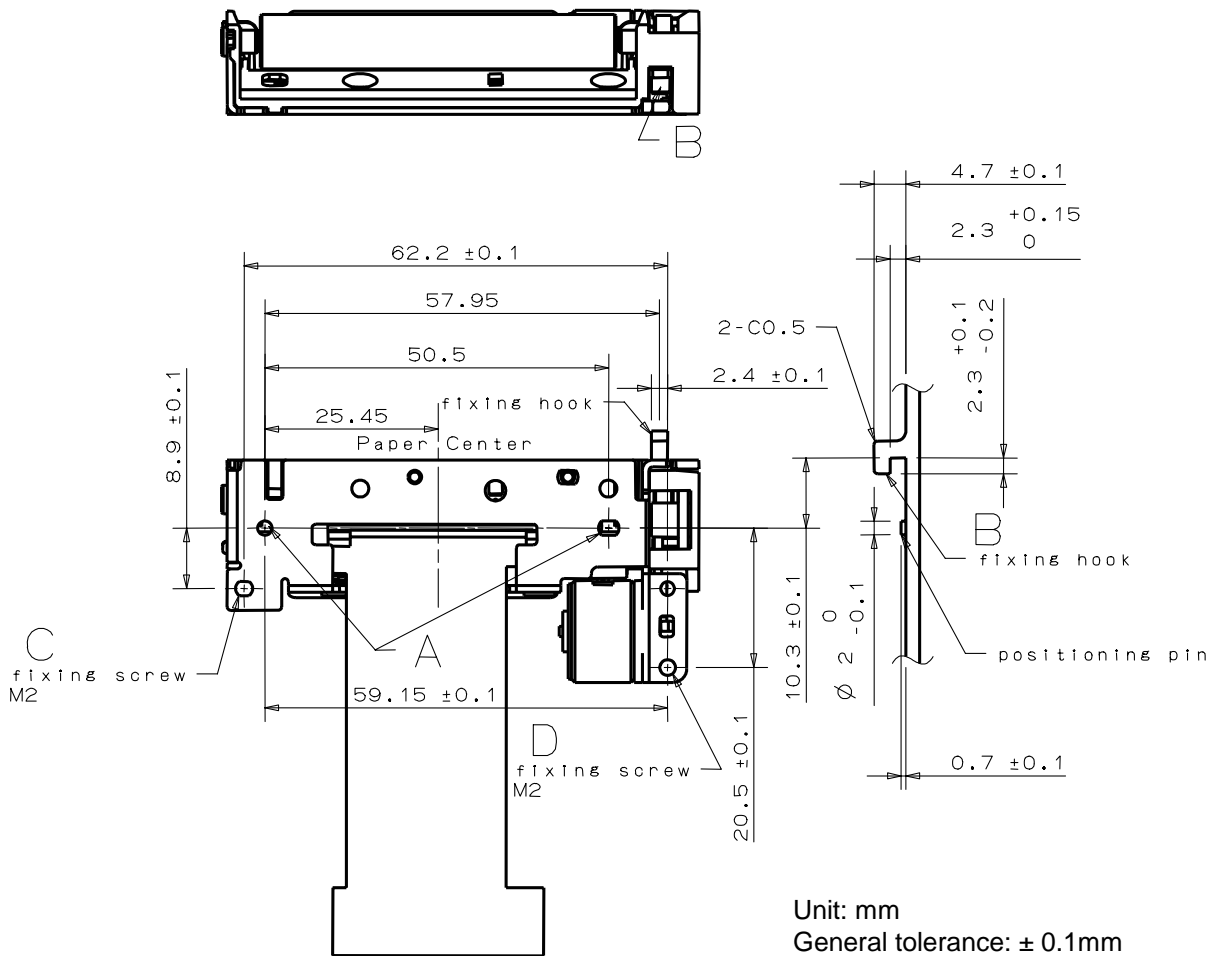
Dimensions and Layout for Positioning and Fixing the Printer
